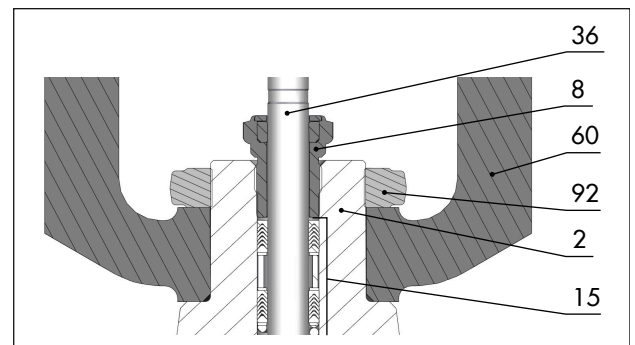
Packing with threaded bushing (centrally fastened) (example shown)
